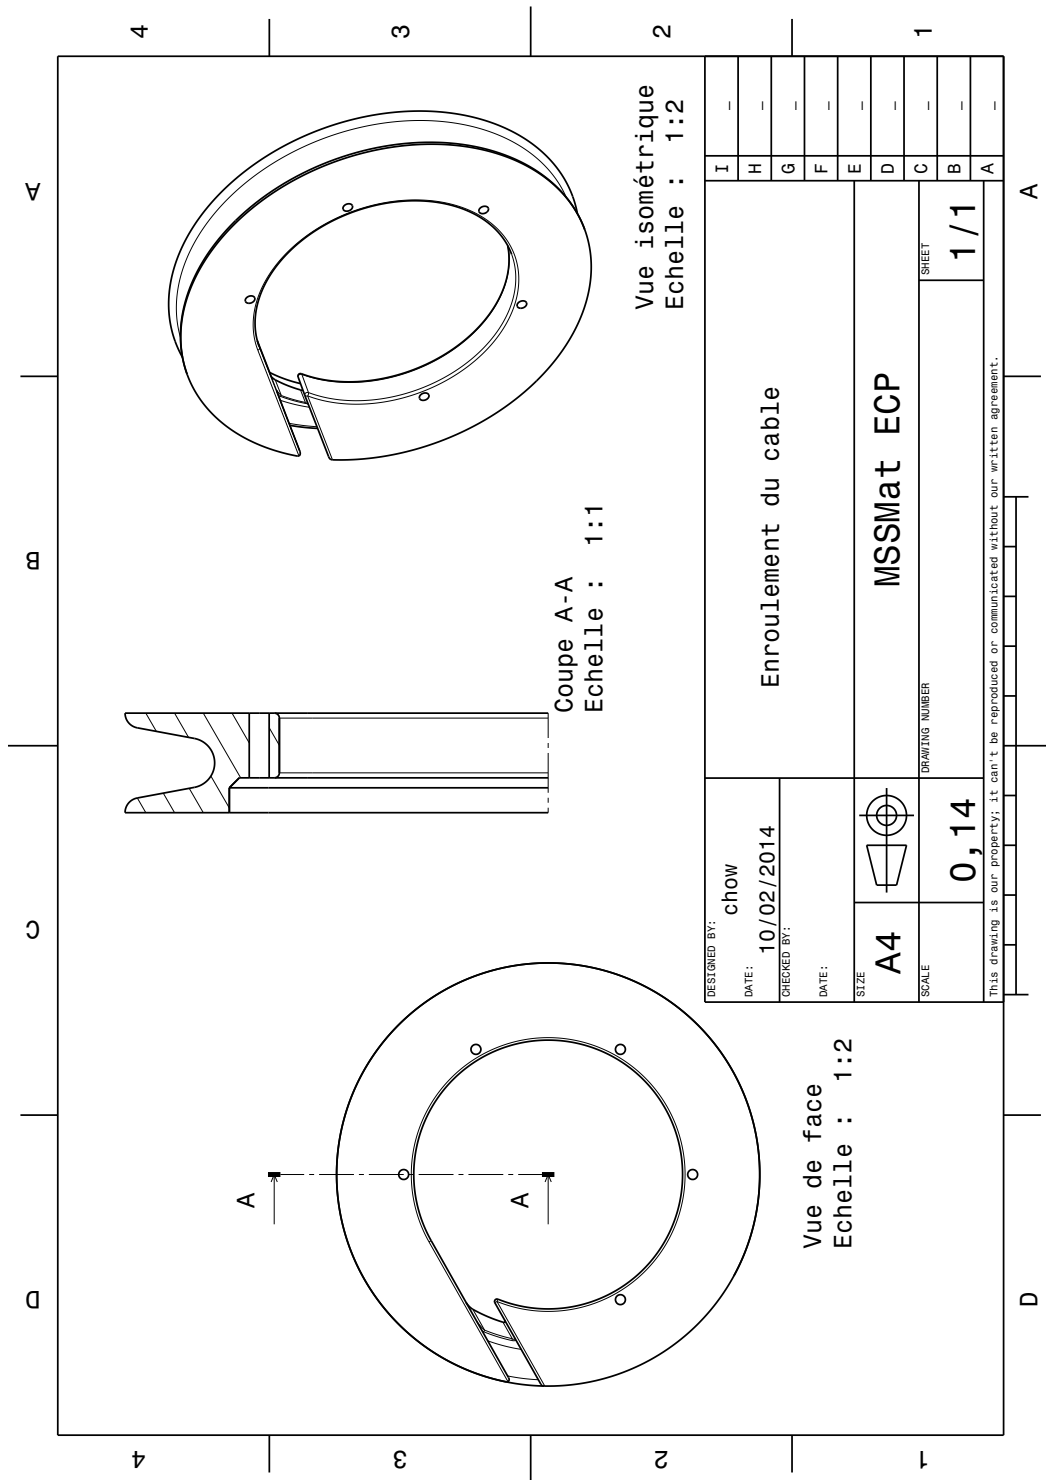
Wire winding to tide up the connecting cable (3D printing in polymer).
